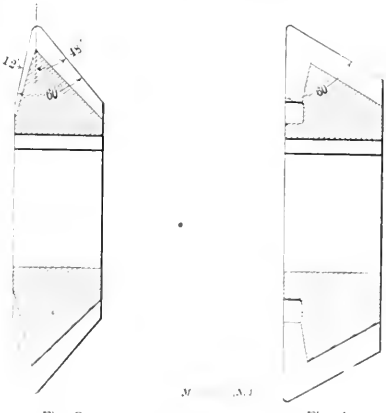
Cutters used in Fluting Spiral and Straight Tooth Cutters
